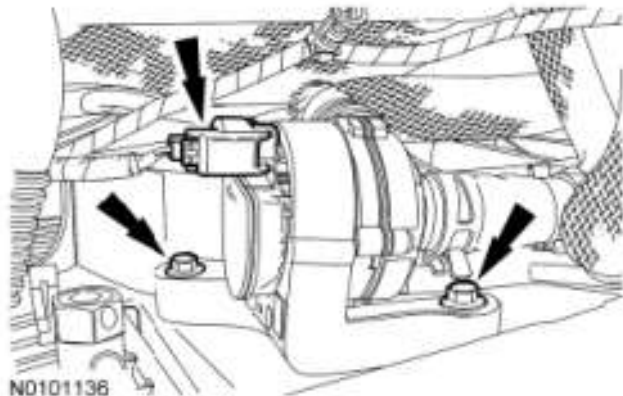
Locating Auxiliary Coolant Pump Electrical Connector
